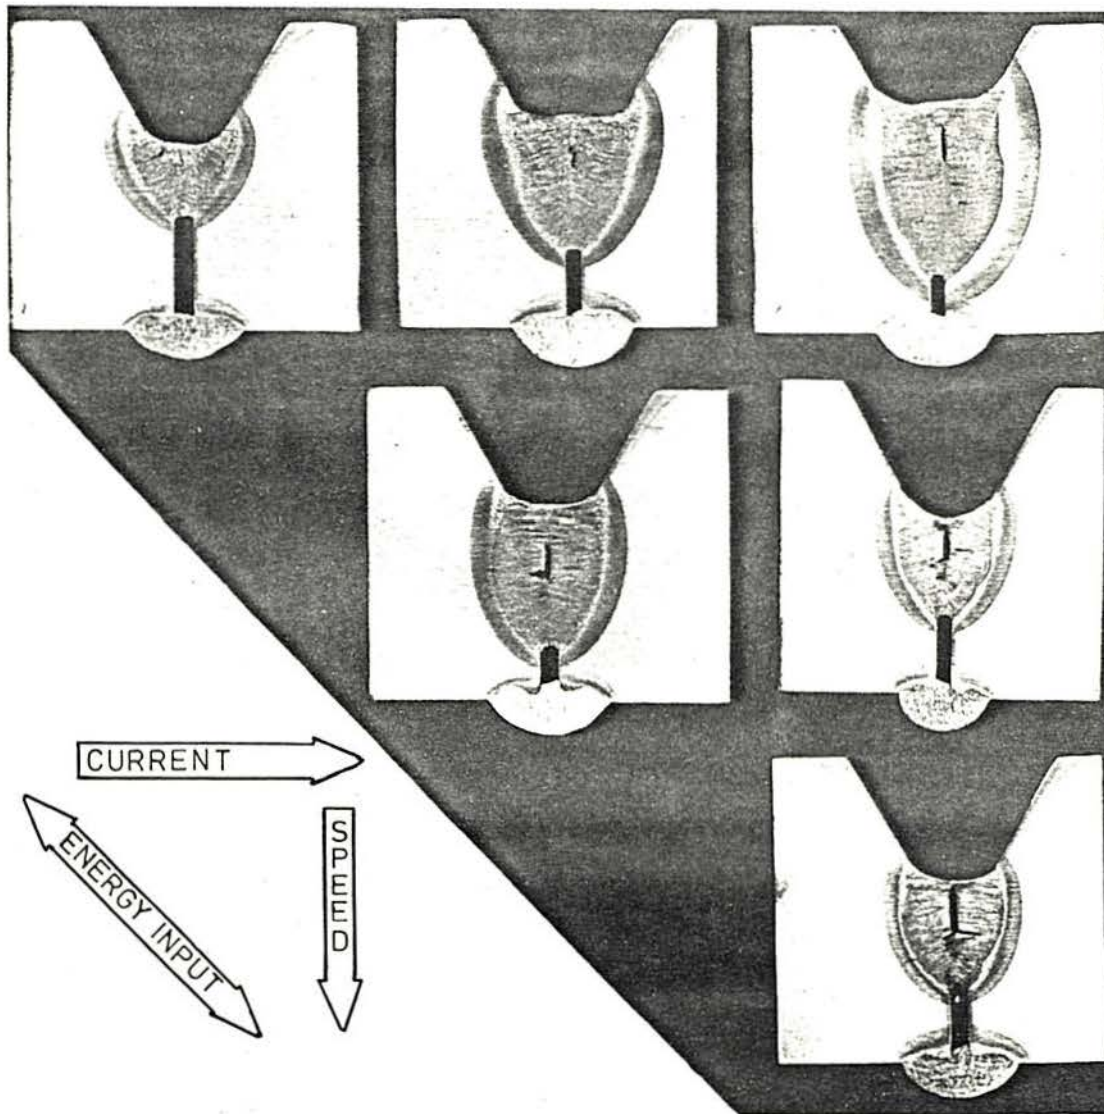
Q2N WELDMENTS.
